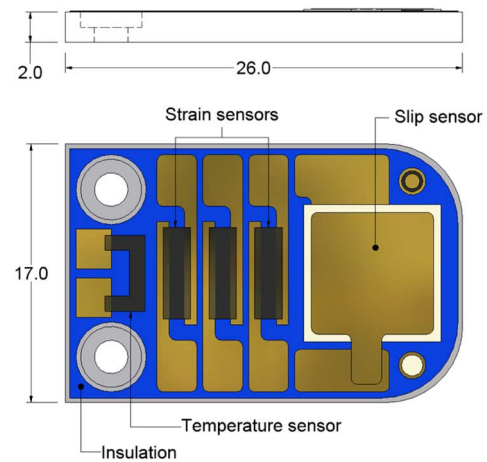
Prototype fingertip (all dimensions in millimeters).
